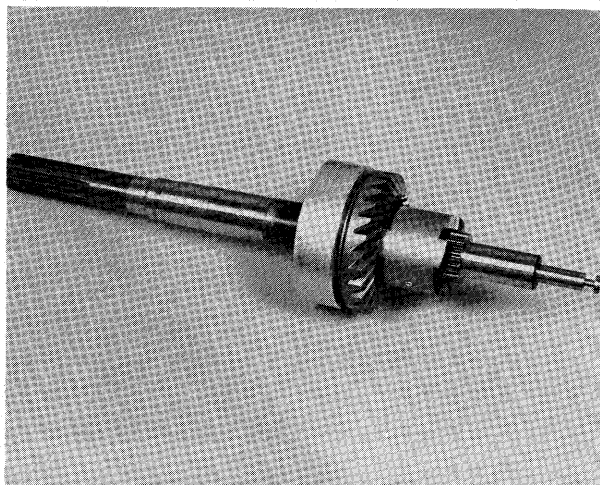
Installing Reverse Gear Assembly on Prop Shaft
